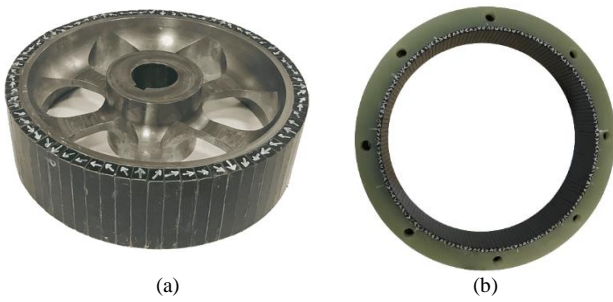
Fully magnet populated (a) inner rotor, (b) outer rotor.
